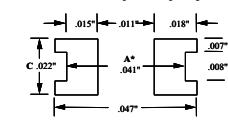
The modified stencil aperture design used to eliminate passive tombstoning.
